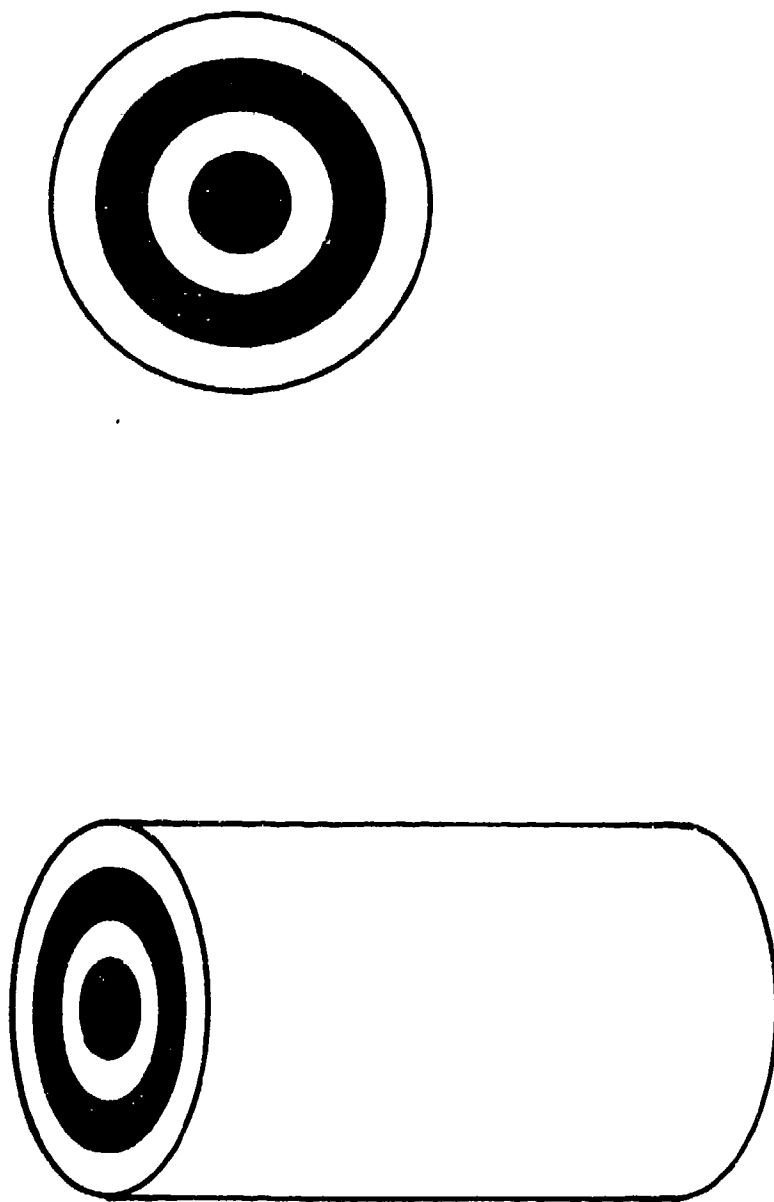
Final cylinder assembly for the stratified, bimetallic disc.
